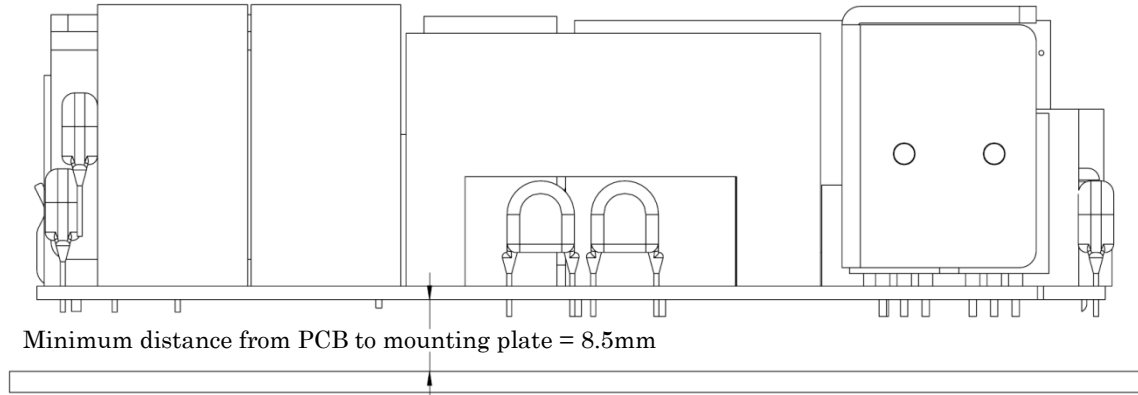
XMLE500 minimum distance requirement from mounting plate
